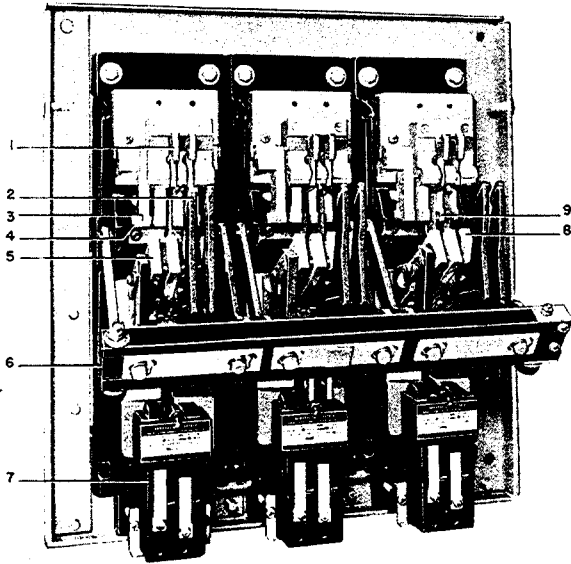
(8014678) Front view of back frame assembly - AK-2-50
